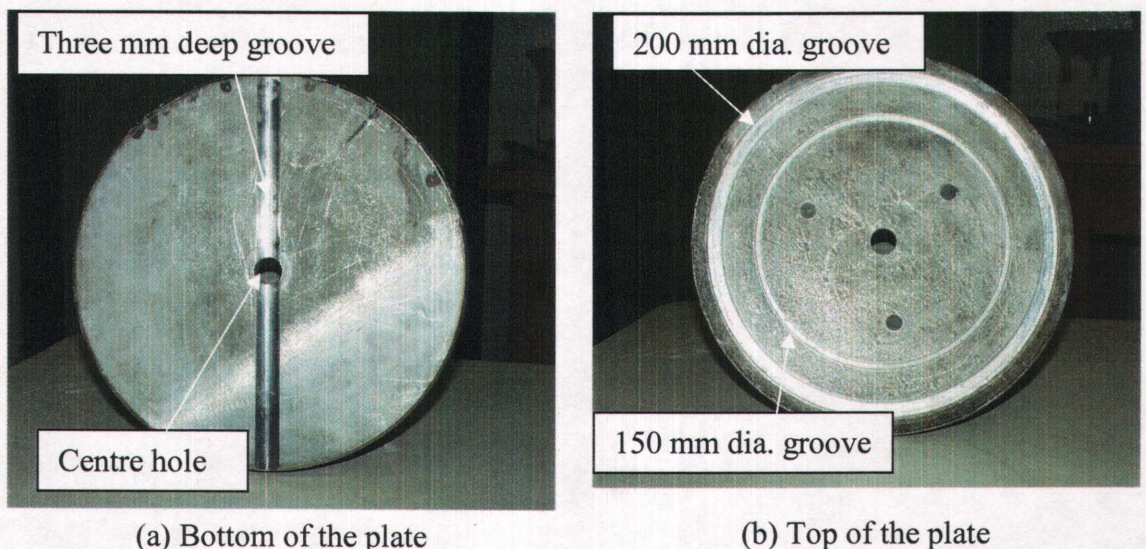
Details of the 240 mm diameter x 20 mm thick stainless steel bearing plate.
